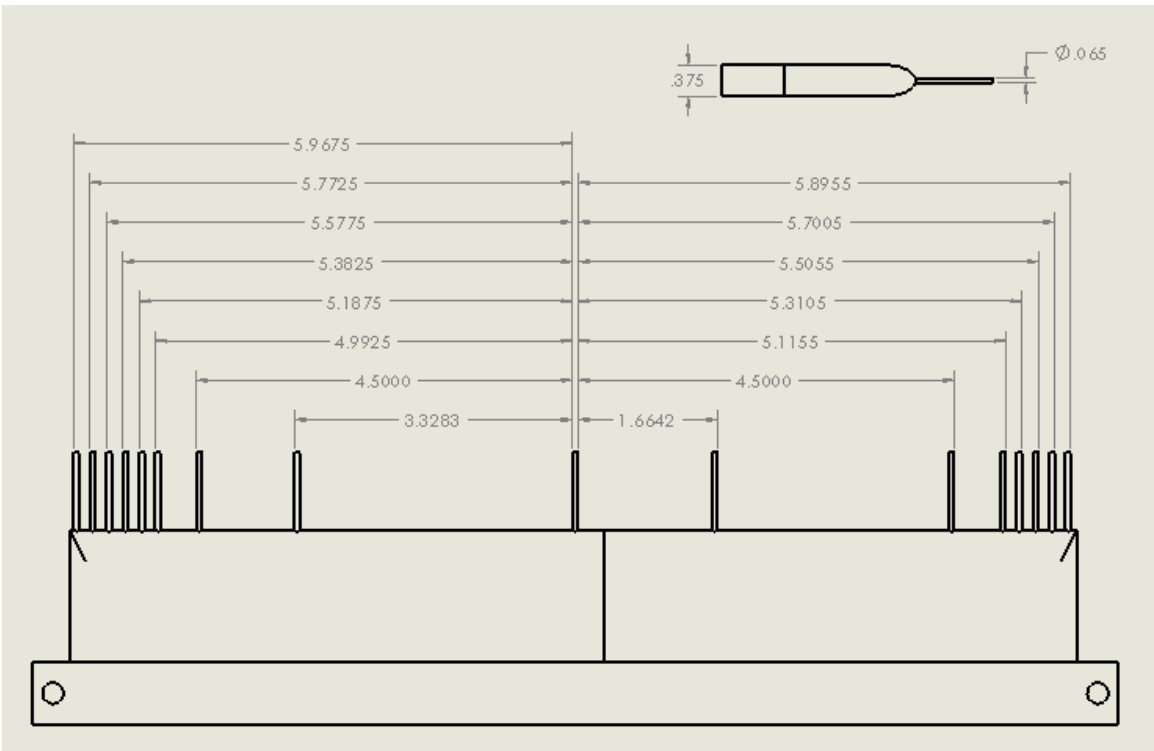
Engineering drawing of assembled rake probe with probe spacings
